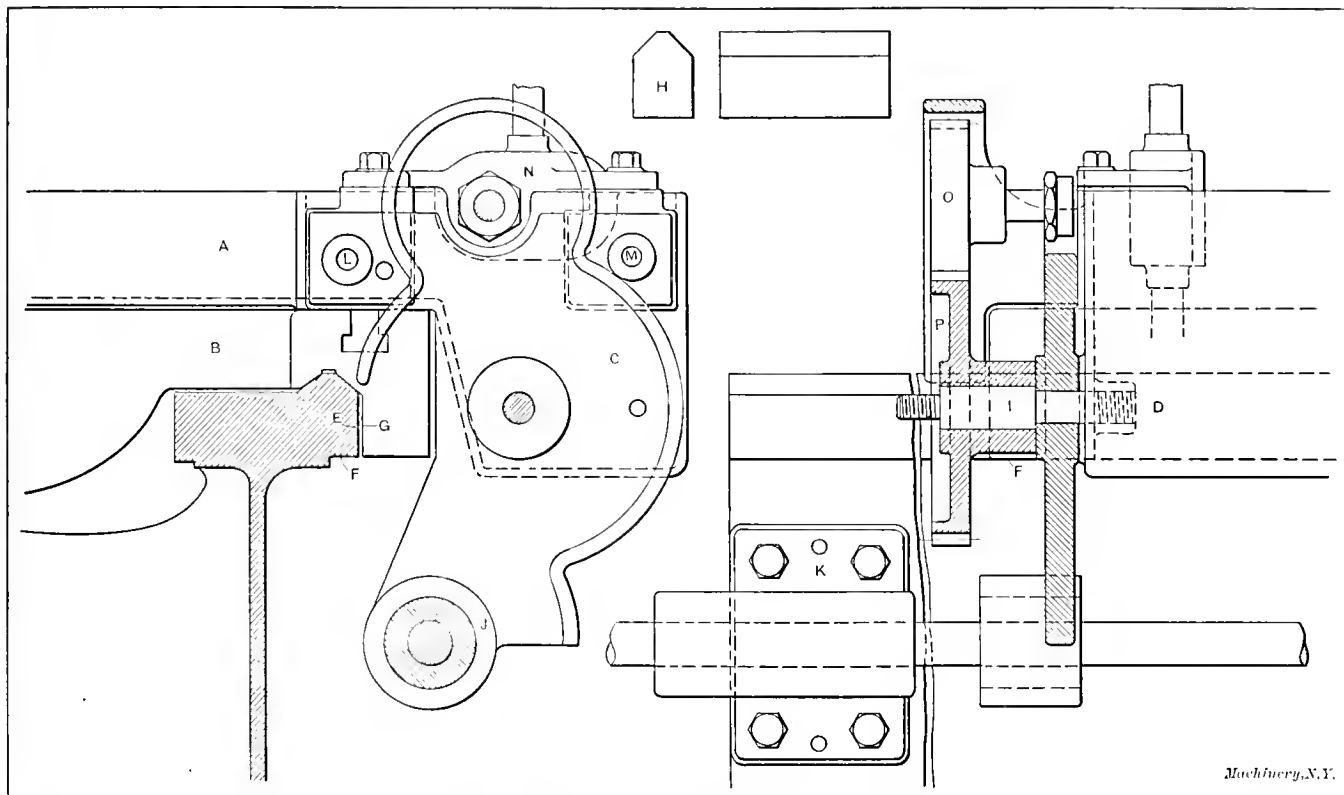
Method of Laying Out and Aligning an Oil Pump Attachment on an Engine Lathe. Illustrating the Principle of Avoidance of Assembling all the Members together for the Laying out Operations
